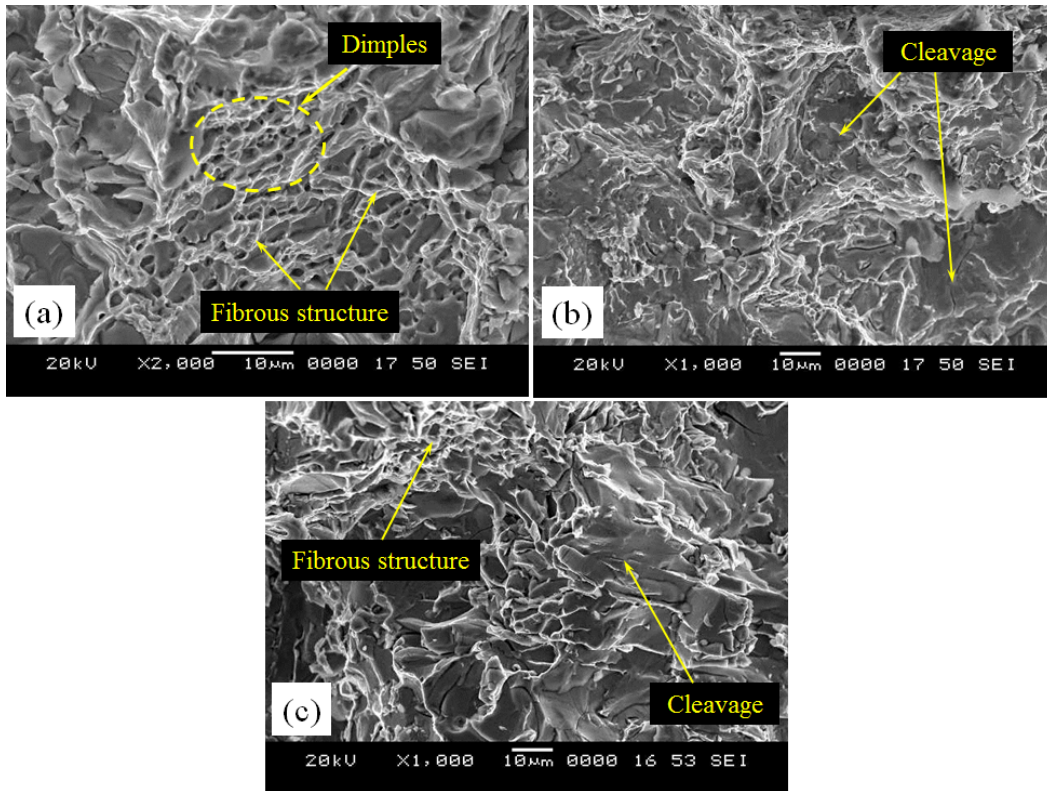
SEM micrographs showing fractured surfaces of the specimens developed with 600W power
